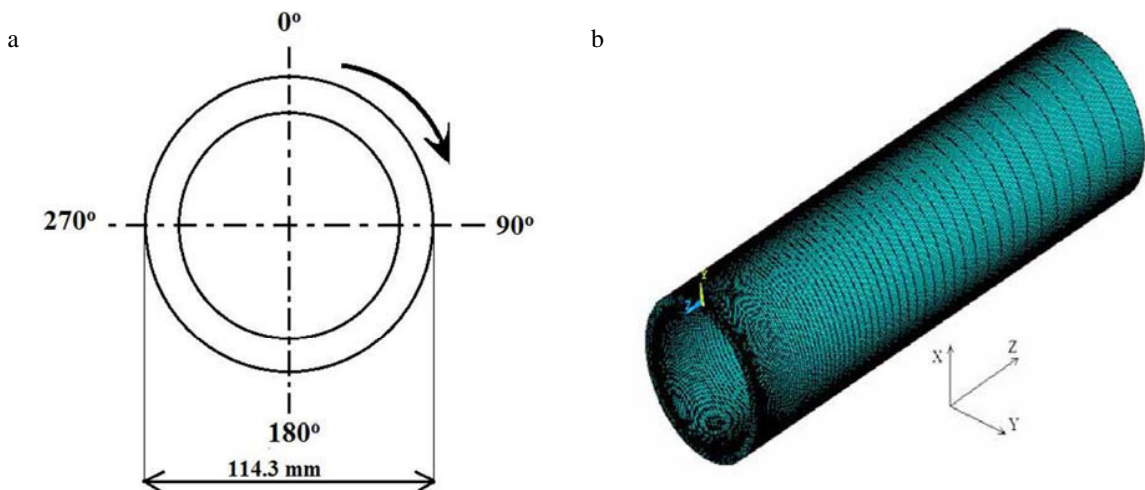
(a) dimensions of pipe and welding direction: (b) 3D finite element model of pipe
